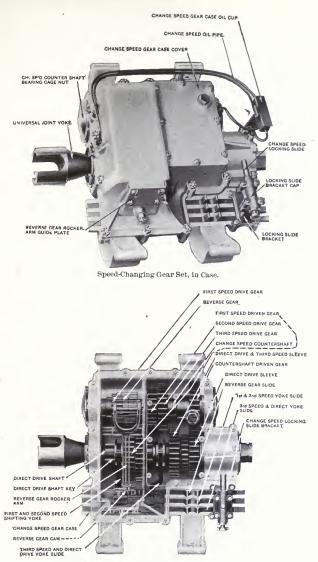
Speed-Changing Gear Set, Cover Removed. Speed-Changing Gear of Peerless Car. Peerless Motor Car Company, Cleveland, Ohio,
